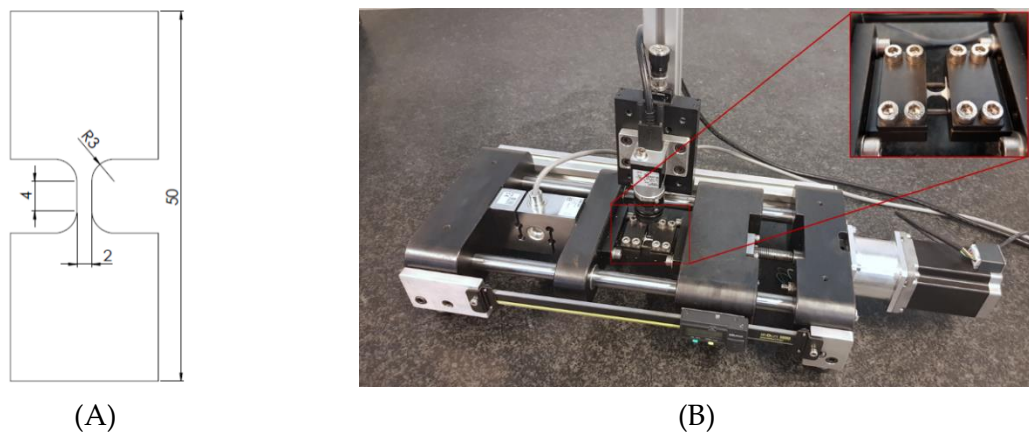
(A) The design of the tensile specimens, dimensions are in mm, and (B) the uniaxial tensile test equipment and sample
